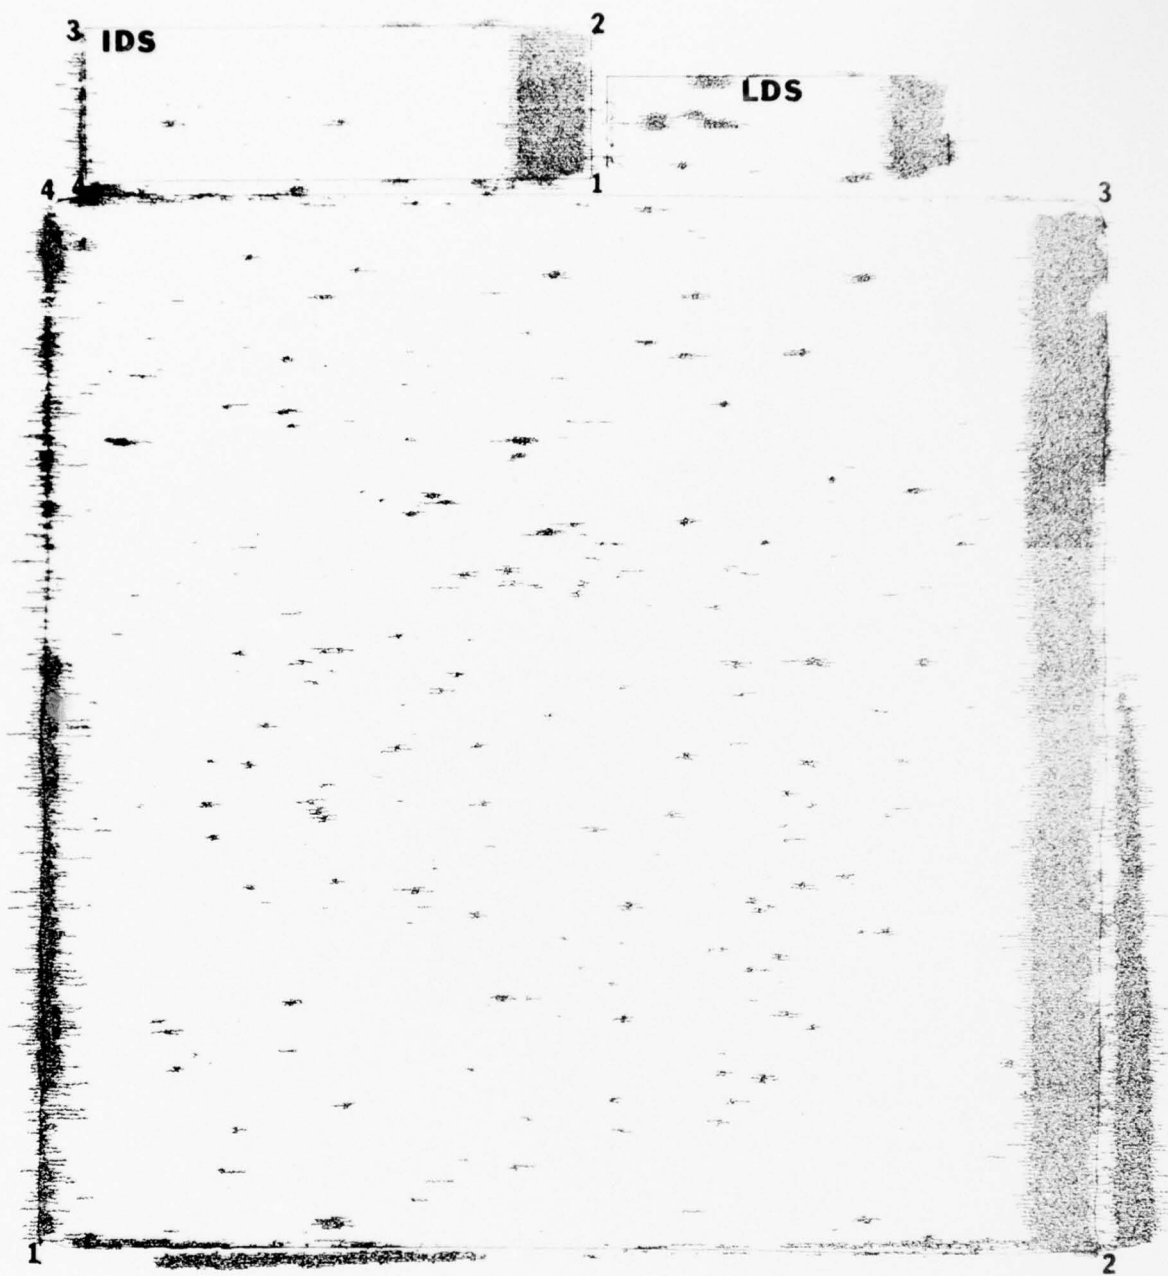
C-scan Recording of 45 MHz, 11° Shear Wave Inspection of Ceralloy 147A, After Machining Using Longer Defect Gate.
